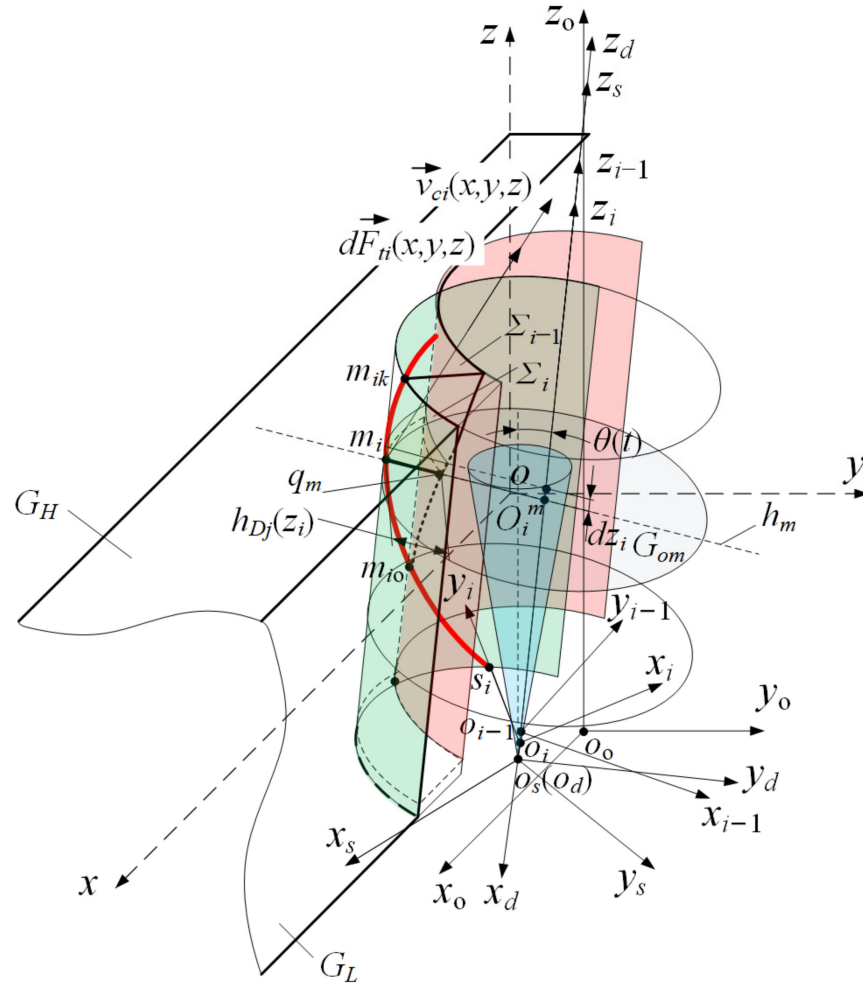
Instantaneous cutting speed and main cutting force of the cutter tooth cutting edge.
